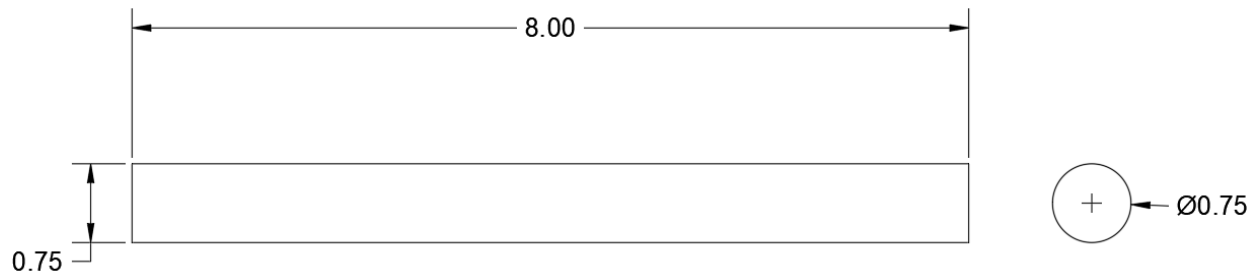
Steel coupon dimensions for ASTM A36 sample (inches)
